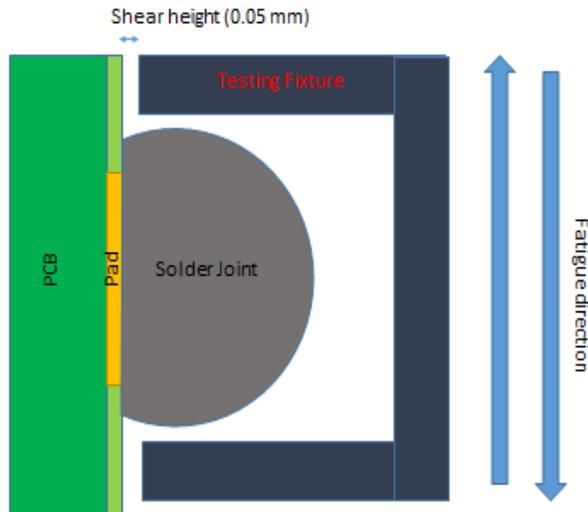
Schematic of the cylindrical testing fixture for individual solder joint
